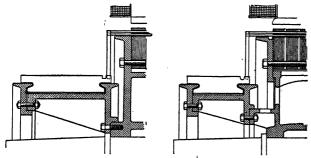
Commutator Construction for Large Machines. Commutator Spider is Bolted to Armature Spider
